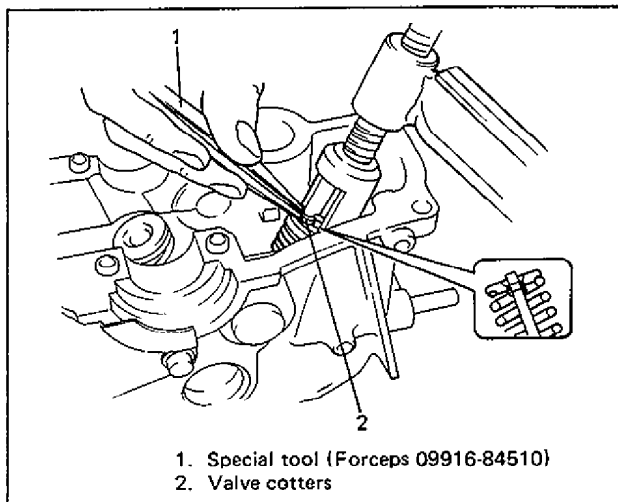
A-80 Special Tool (Forceps) and Valve Cotters
